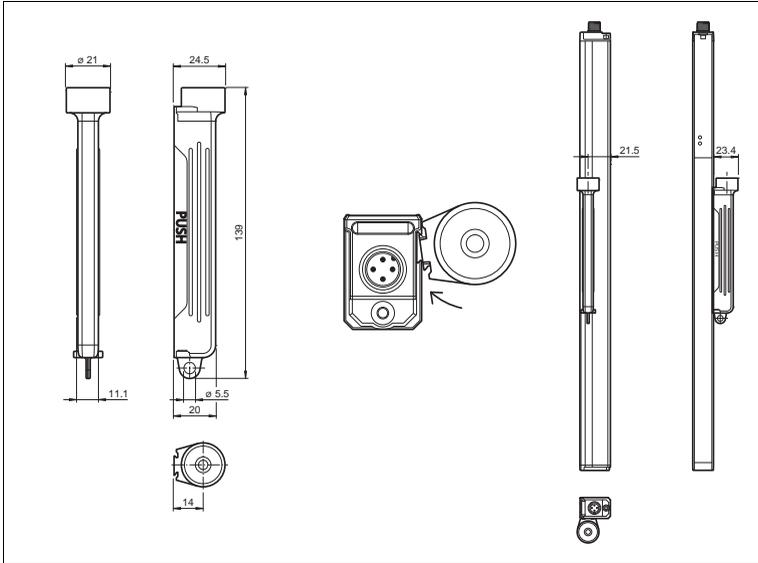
Dimensional drawing and assembly of the alignment AA-SLCT-01
